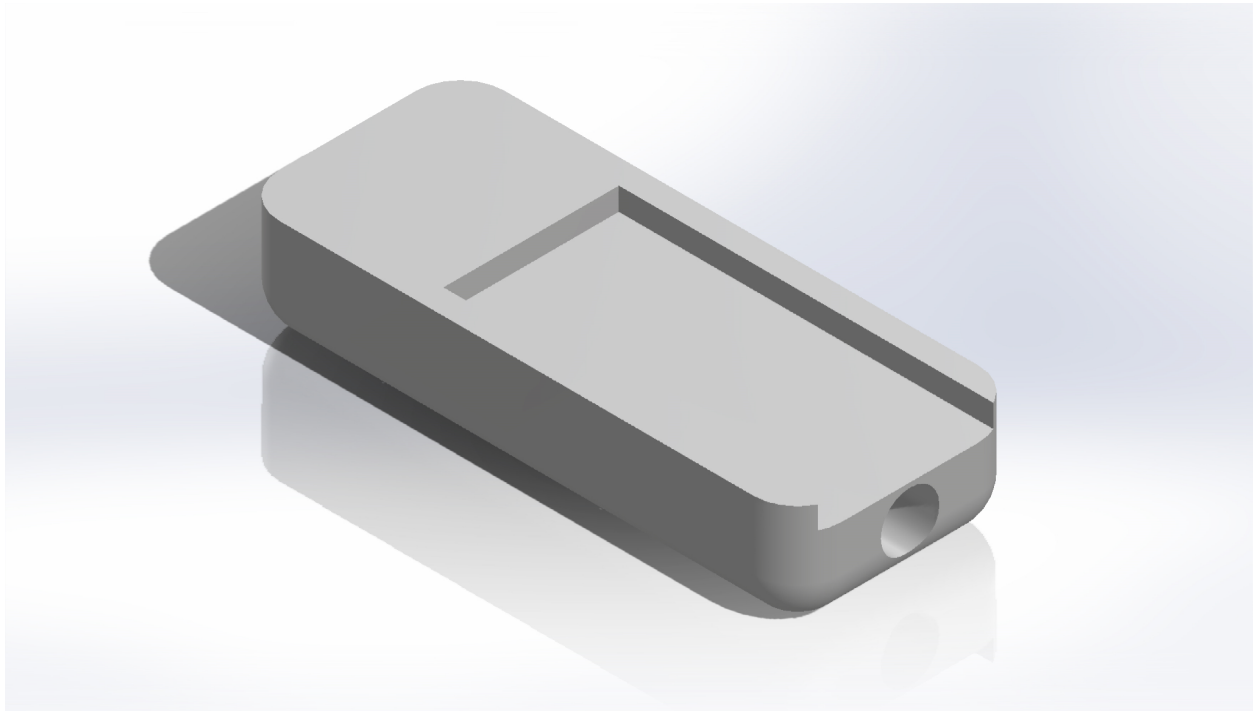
Remote Control Case SolidWorks drawing [by Gianna Inga]
